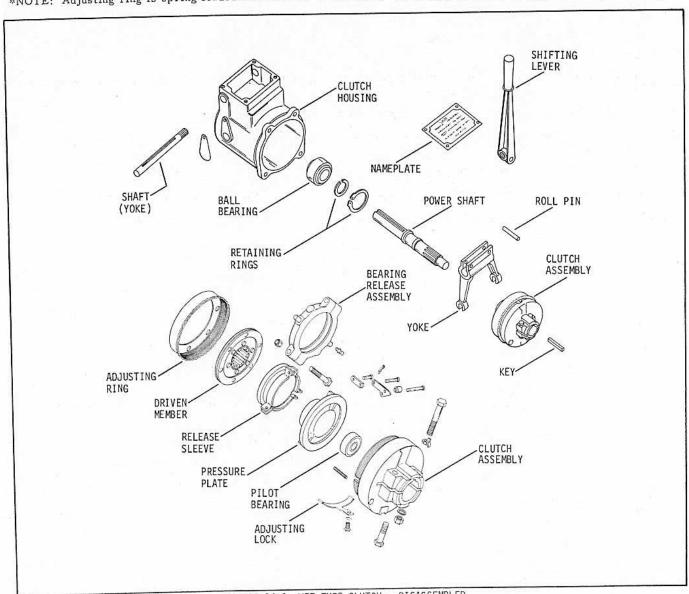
WET TYPE CLUTCH - DISASSEMBLED
